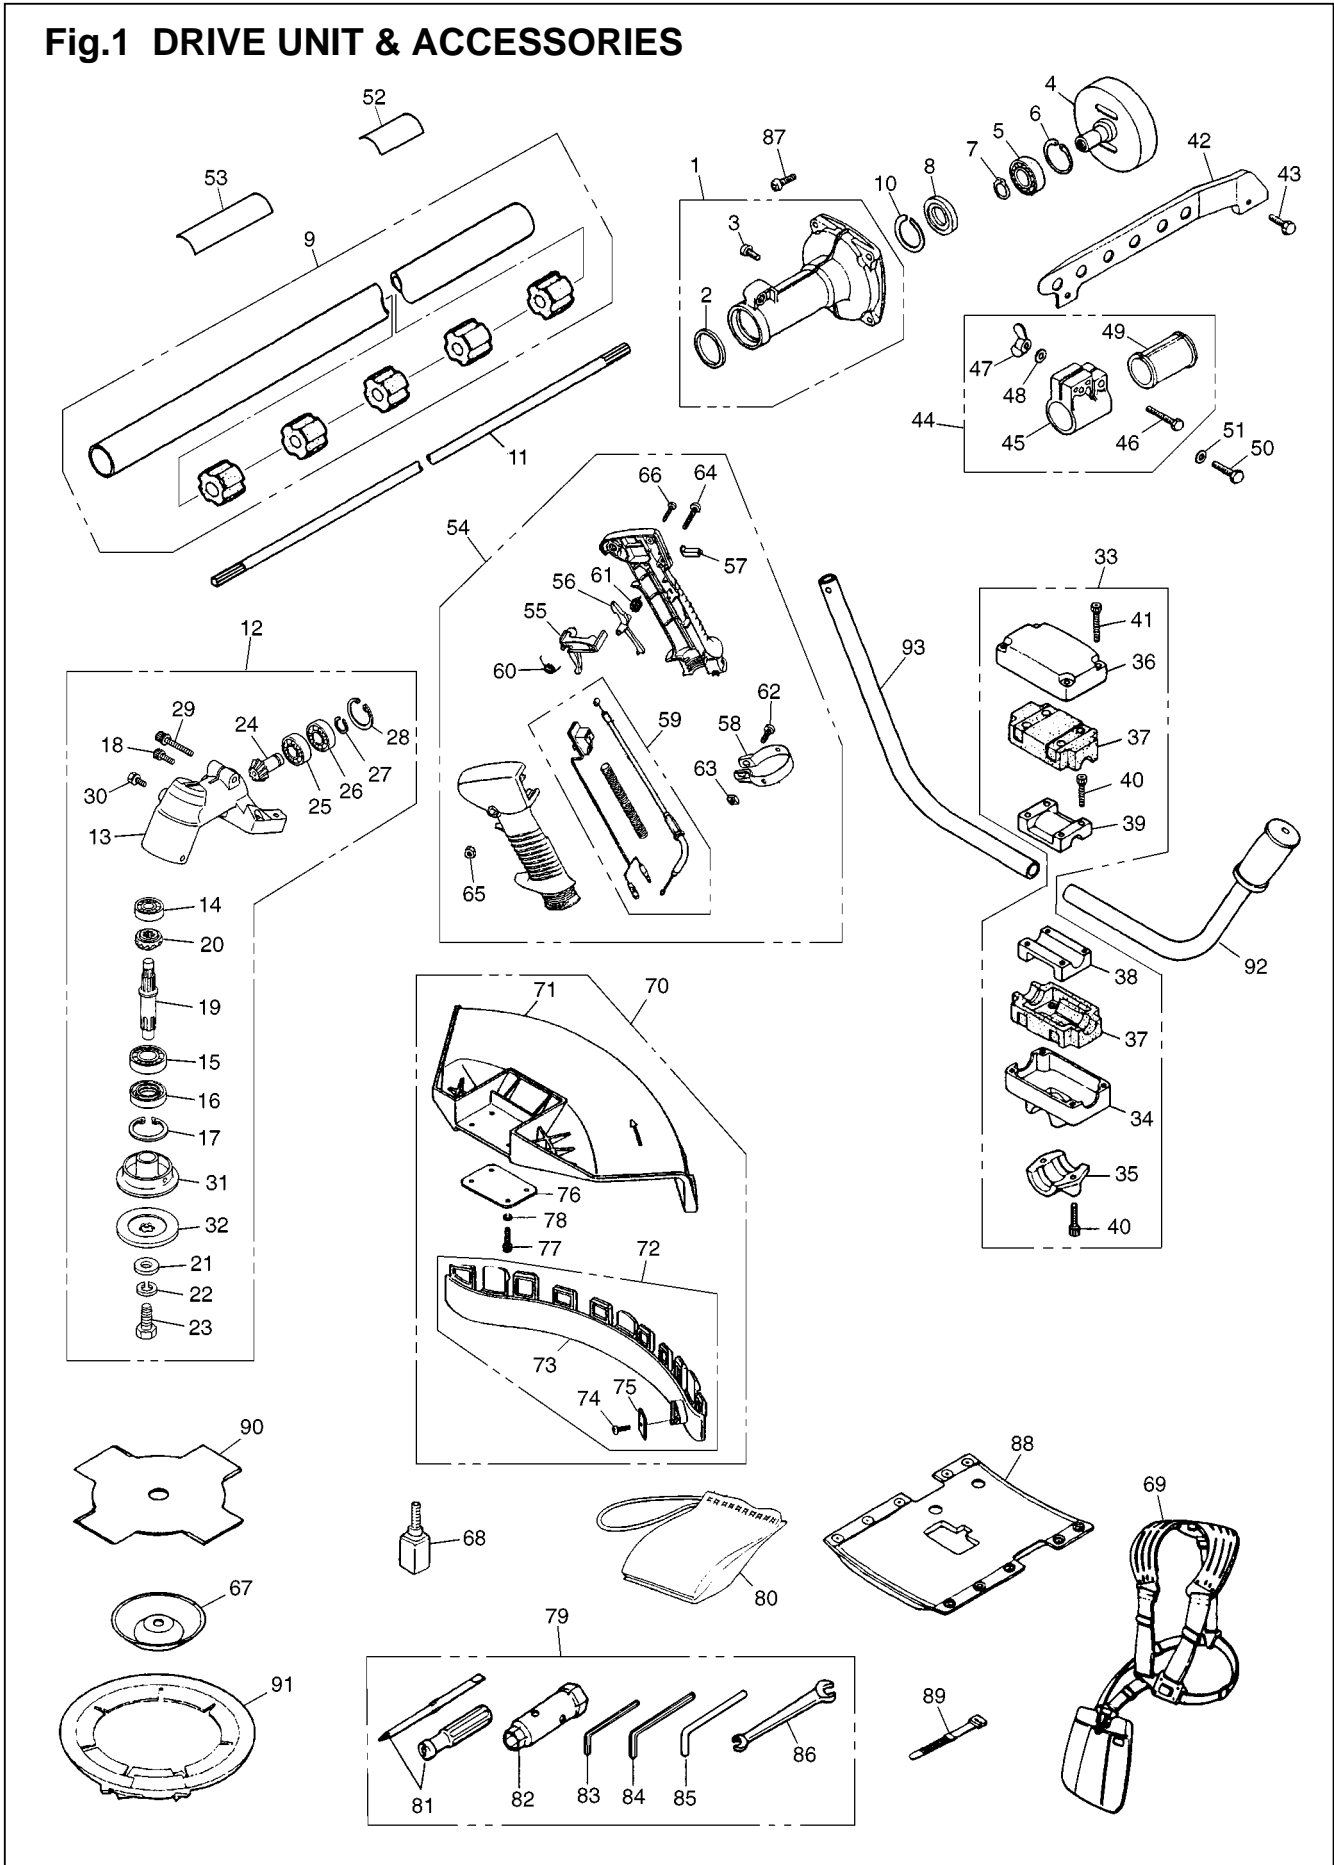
DRIVE UNIT &amp; ACCESSORIES
